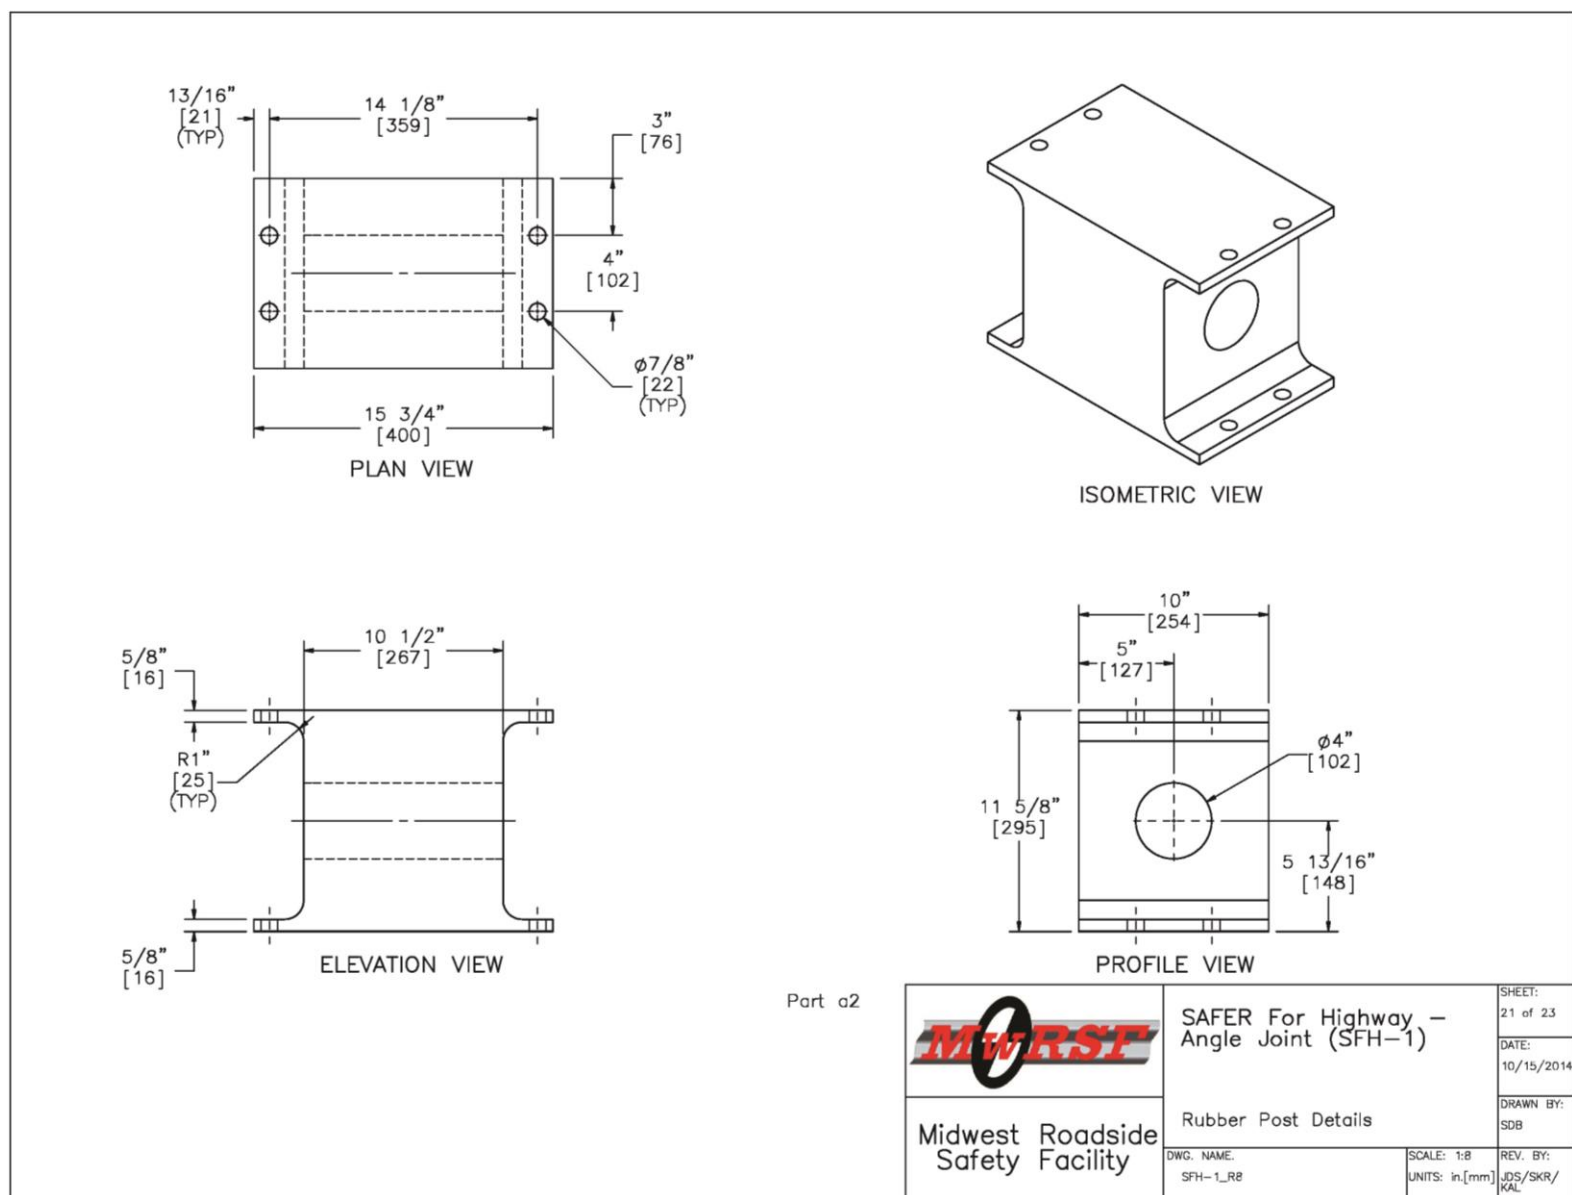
Recommended Barrier Design for Full-Scale Crash Testing, Rubber Post Details
